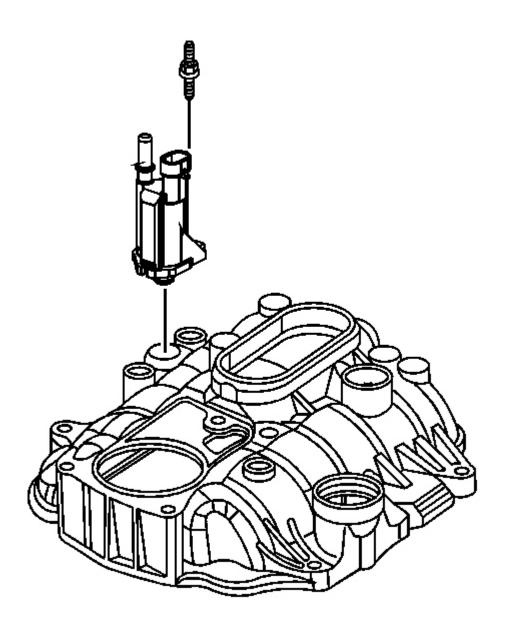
Purge Solenoid & Nut Courtesy of GENERAL MOTORS CORP.
